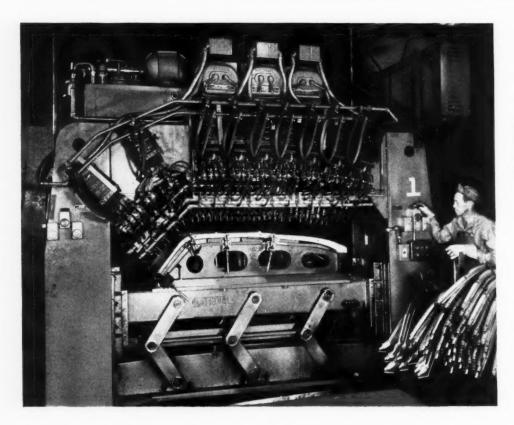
Special Current-carrying Welding Guns are Employed on This Resistance Welder to Permit Making 144 Spotwelds in the Limited Space Available
